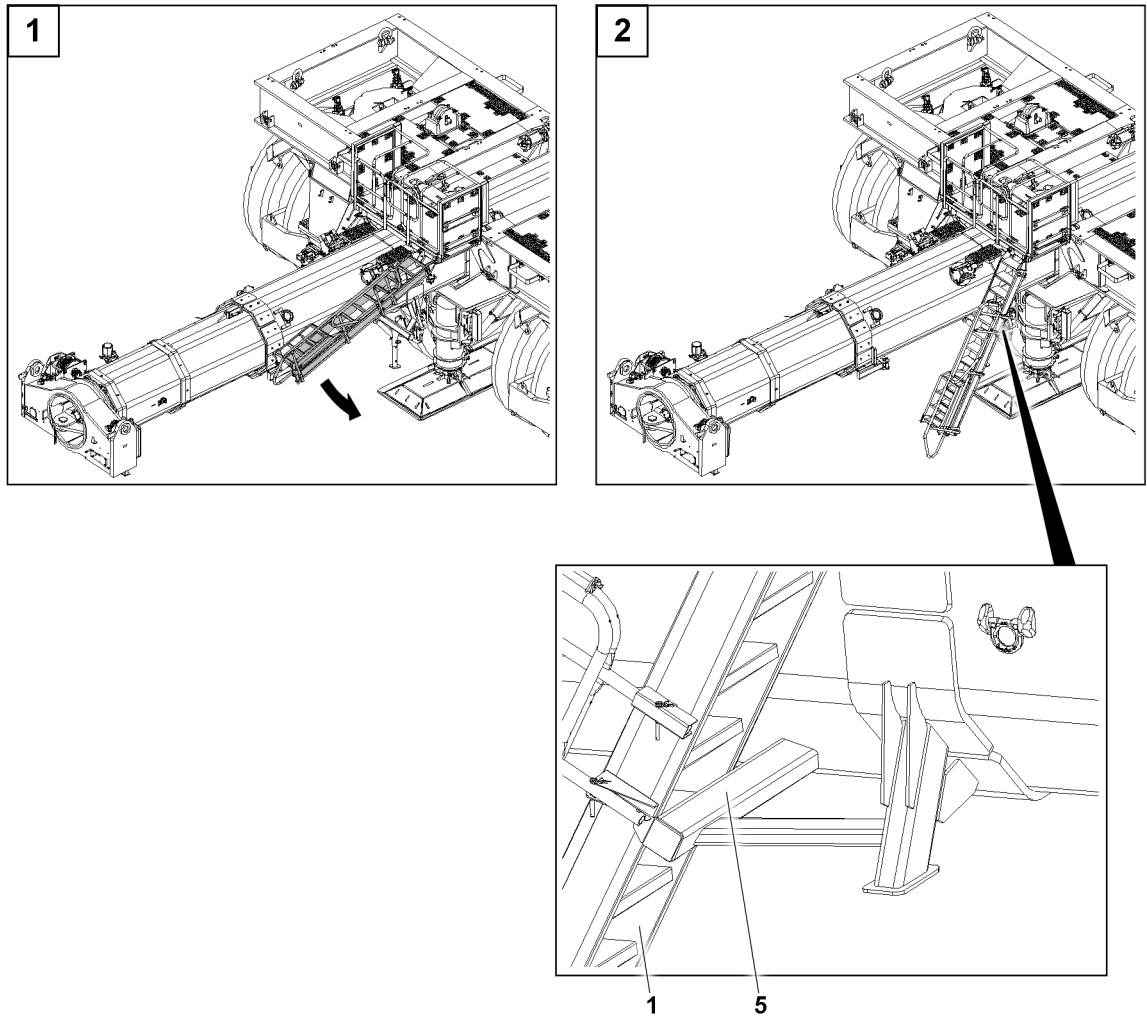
Assembling the ladder in the operating position — folding the ladder into the operating position
